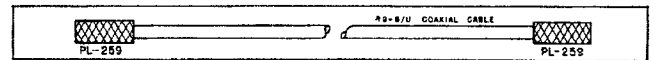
Transmitter-to-Antenna & Transmitter-to-Receiver Cables
